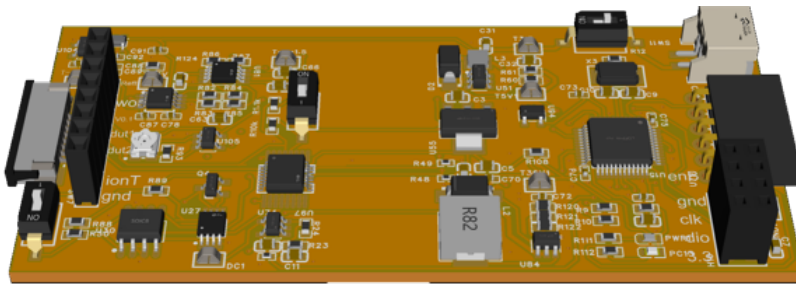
3D view of PCB Version 2 showing rigid and flexible regions.
